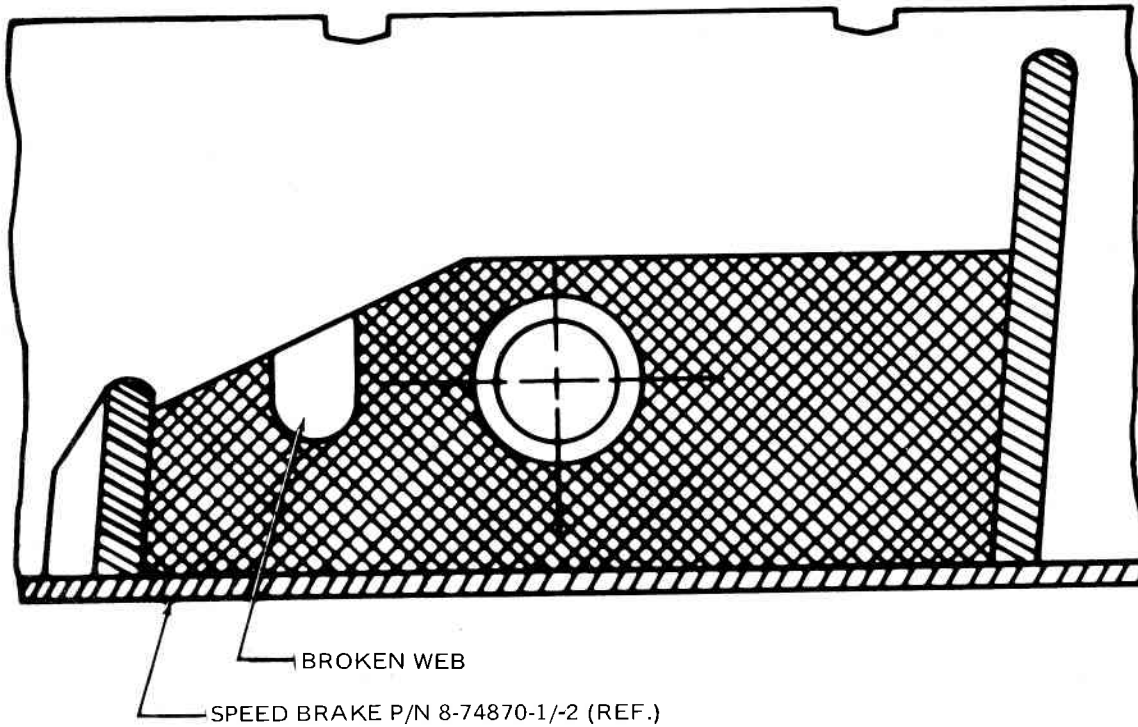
D. Speed Brake Door Flange Repair (Sheet 2 of 2)
